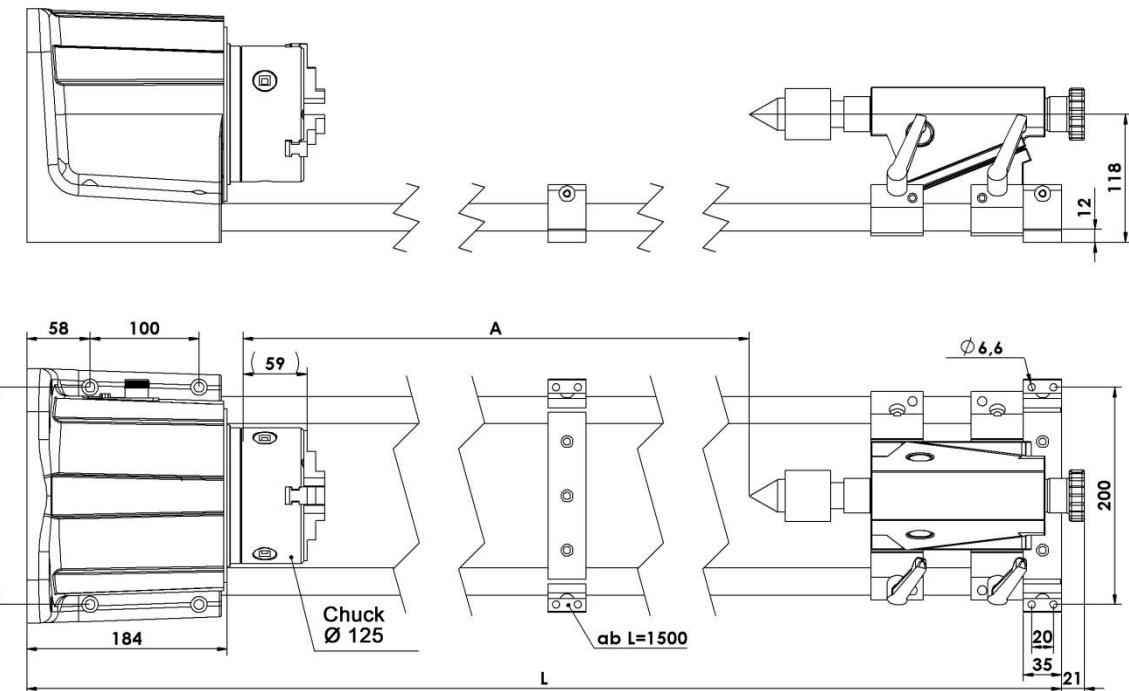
Dimension drawing rotation unit RDH-M with tailstock unit RE M
